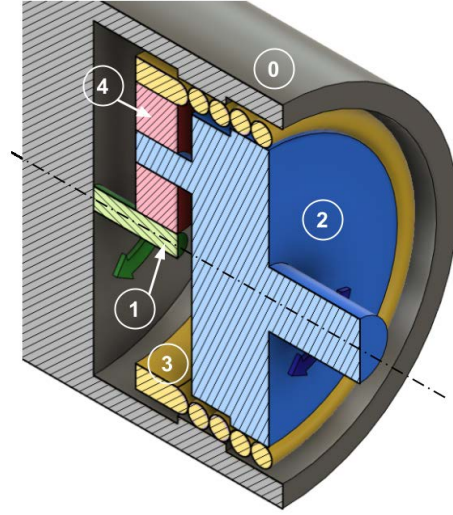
Principle of the LAVT with the chassis ①, the input shaft or sun shaft ①, the carrier or output shaft ②, ring gear and the spring ③ and the satellites ④
